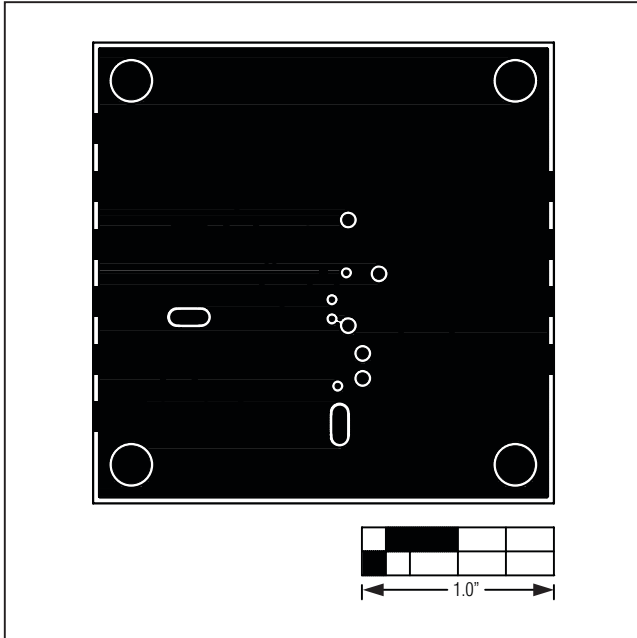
MAX9626 EV Kit PCB Layout—Internal Layer 3 (GND)
